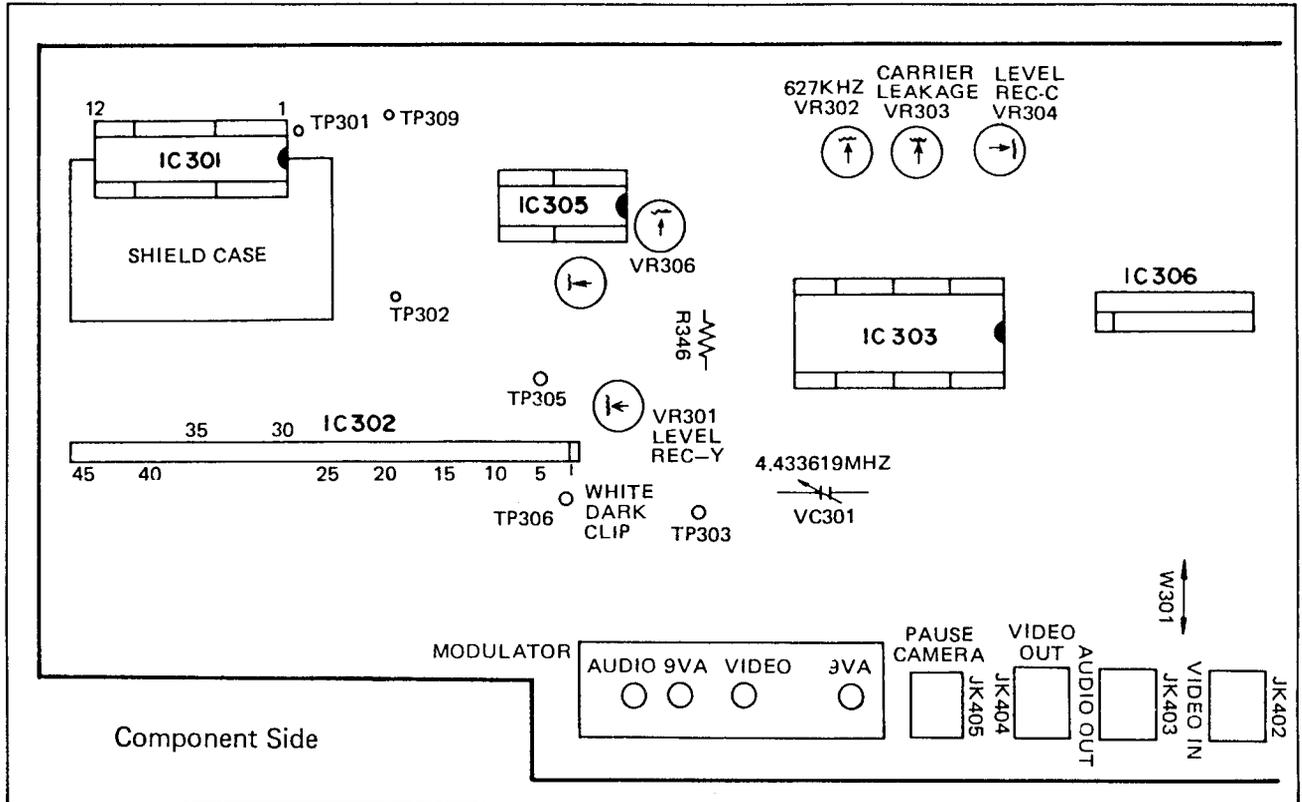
Adjustment and Test Point Arrangement View
